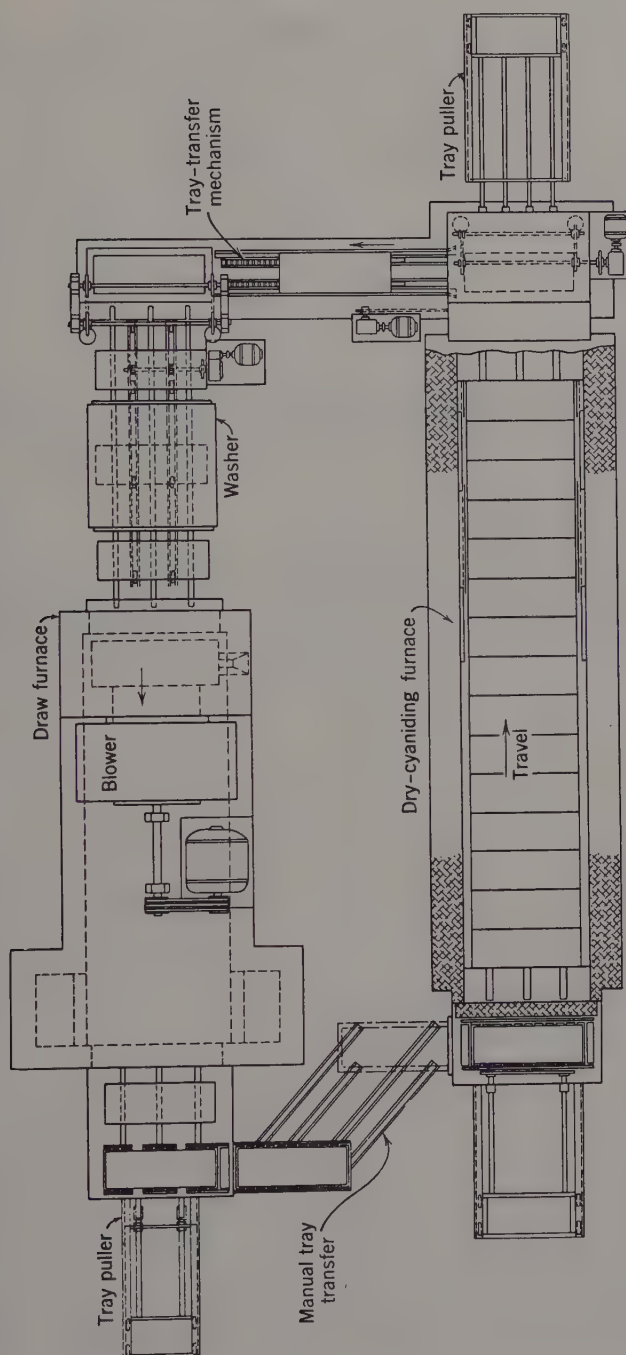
Equipment for moving trays through hardening furnace, quench tank, washer, draw furnace, and back to starting point. Courtesy of Westinghouse Electric Corp.
